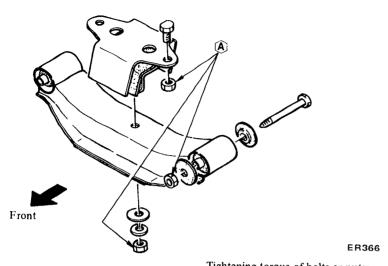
Sectional view of front engine mounting, and front insulator
